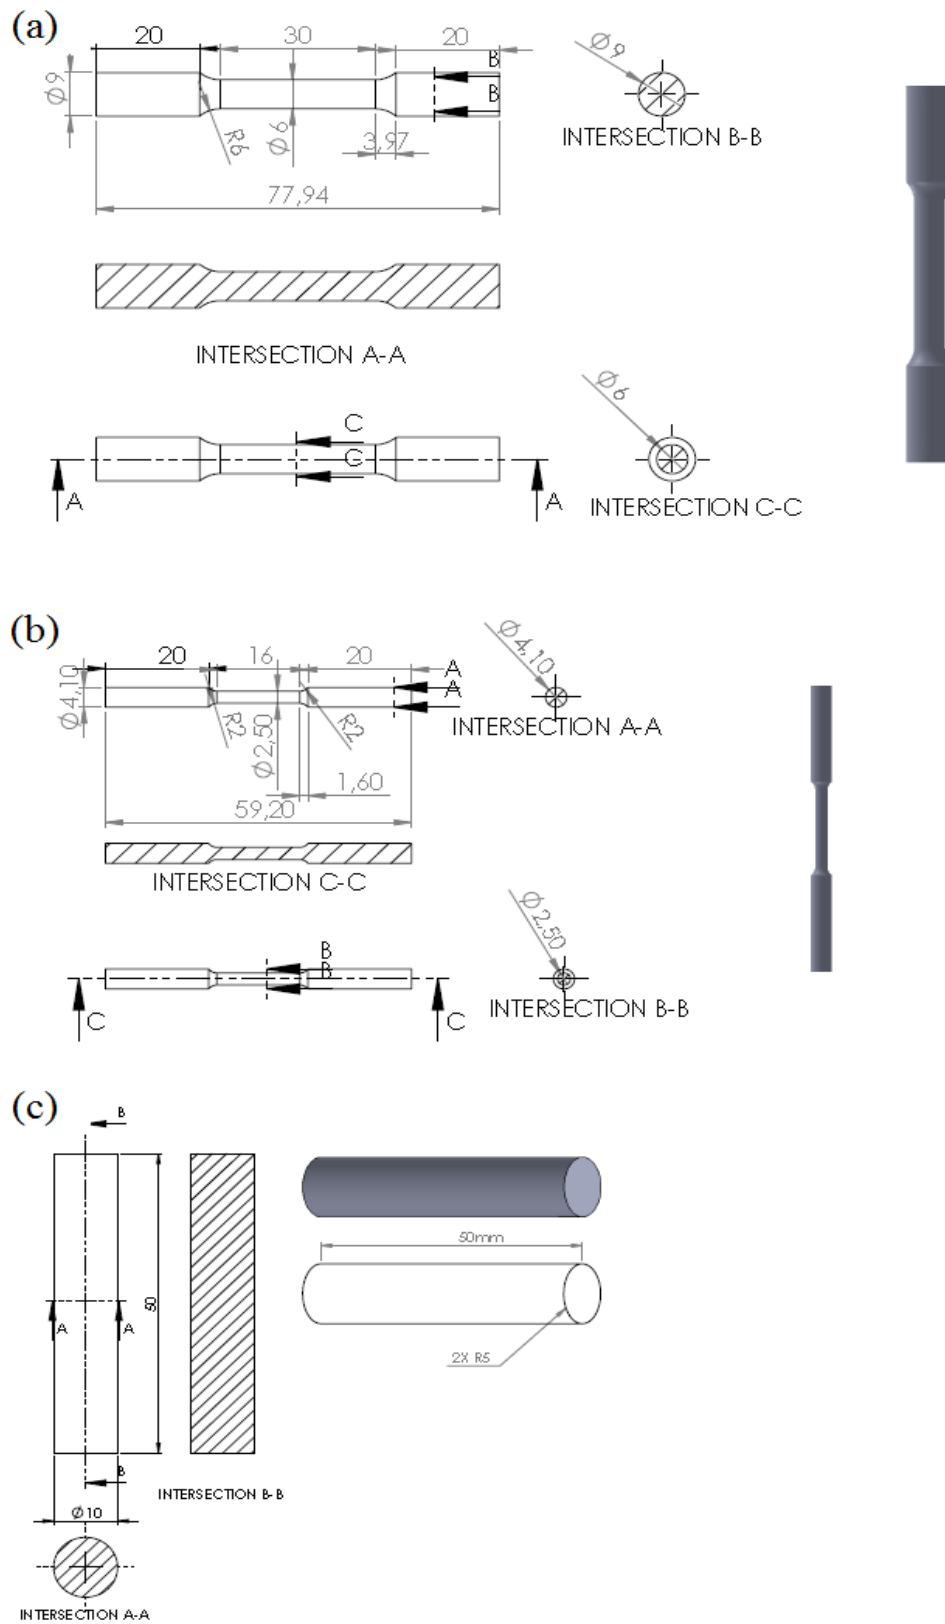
10: Drawings of; (a) 1st type tensile test, (b) 2nd type tensile test, (c) type 3 specimens.
